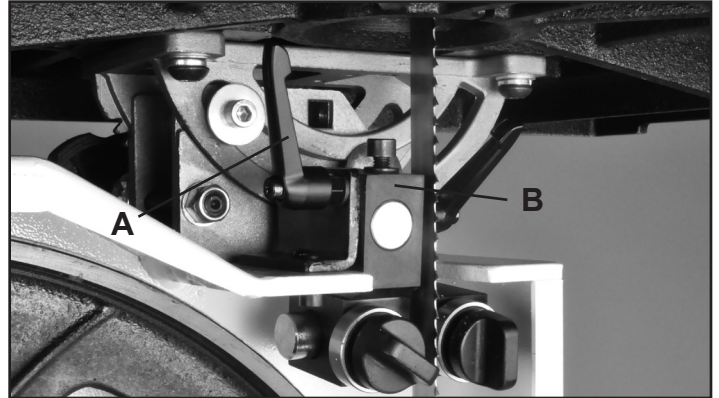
NOTE: Blade Guard removed for photo purposes
